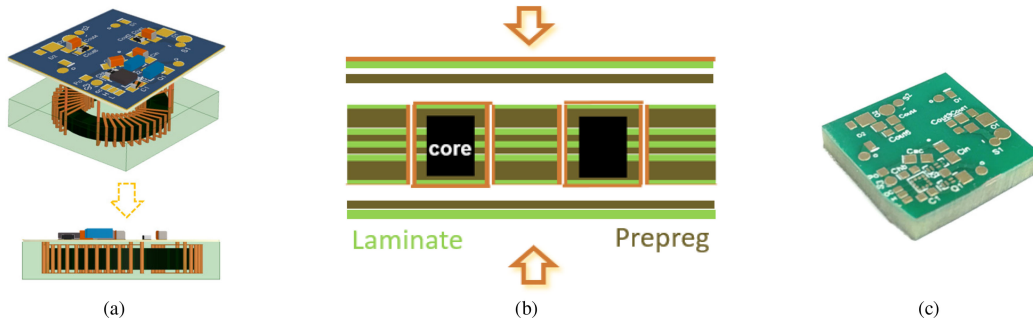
(a) Converter assembly with the transformer substrate. (b) PCB lamination to connect the transformer and the circuit. (c) Converter after the assembly.
